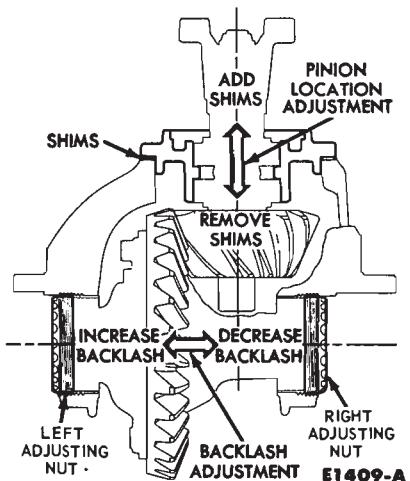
Pinion and Ring Gear Tooth Contact Adjustment—Removable Carrier Axles
